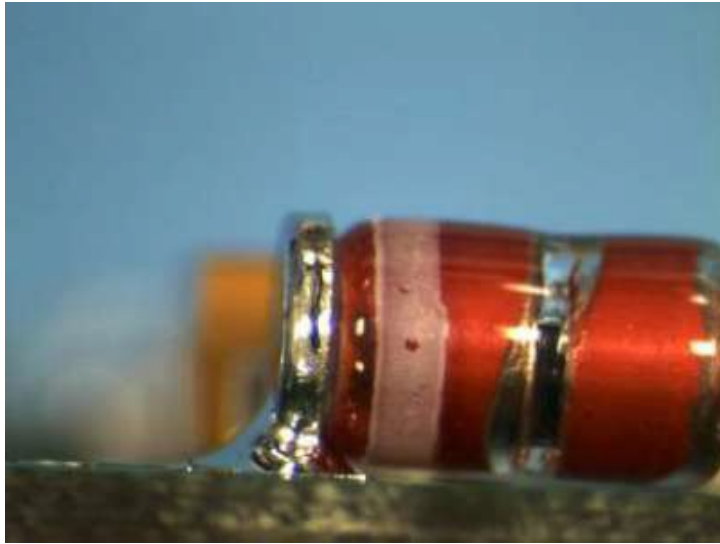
Acceptable, minimum solder -- Terminal wetted along end, face and sides (see also
